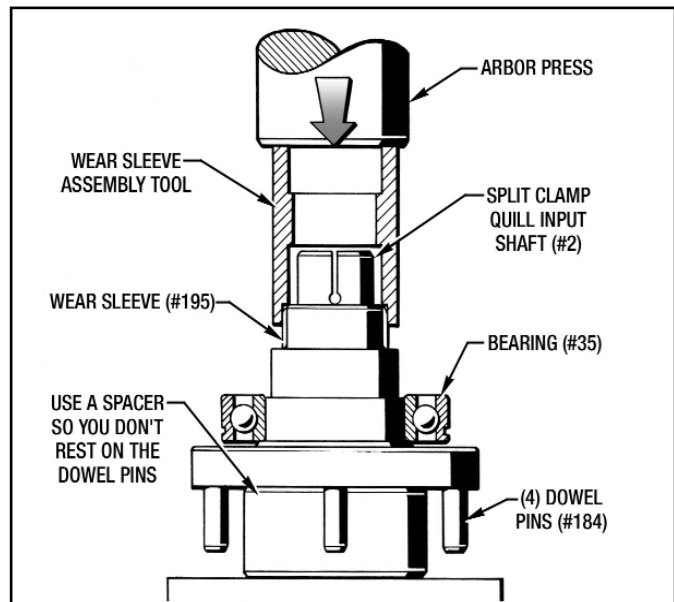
Installing Wear Sleeve (#195) on Quill Shaft
